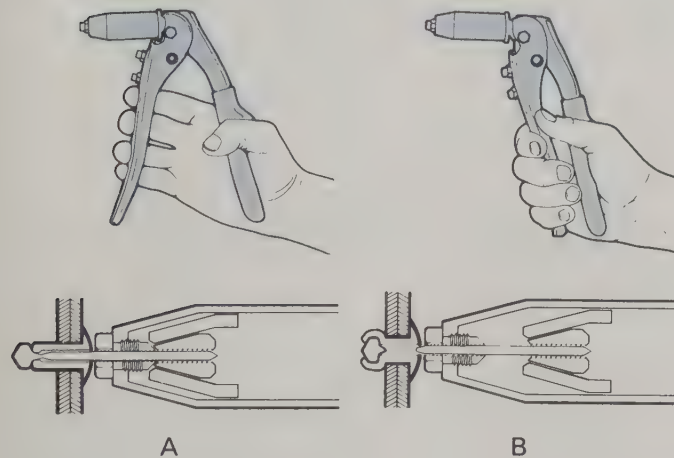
Installation of a blind rivet. A—The mandrel of the blind rivet is gripped by the tool, and the rivet inserted through the material to be fastened. B—When the tool handles are squeezed together, the mandrel is pulled forward, deforming the rivet material to form a head. The mandrel is then snapped off, leaving the rivet in place.
